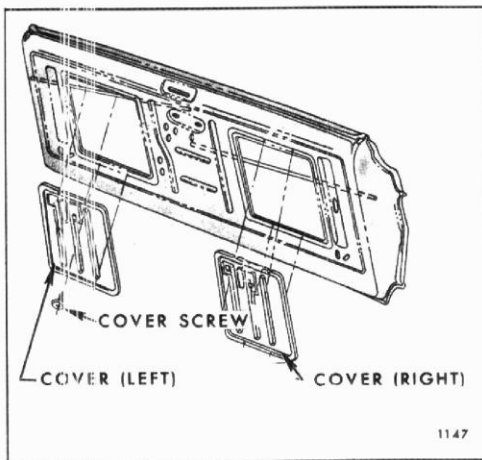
Tail Gate Inner Panel Access Hole Cover
